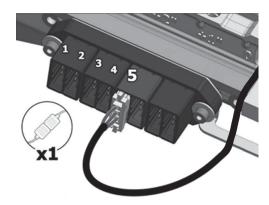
Tilt motor cable is connected to the fifth position of the connector block.
